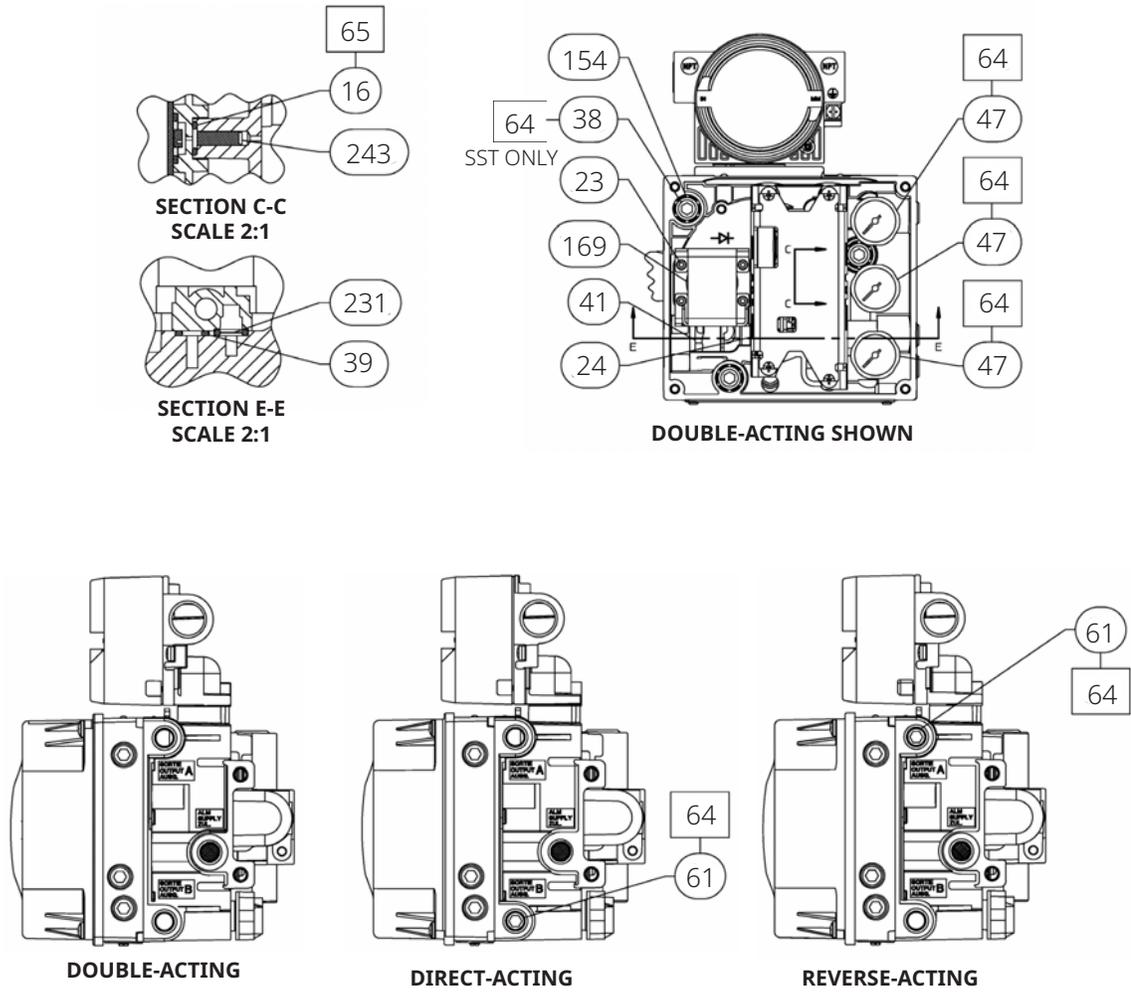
FIELDVUE DVC6205p Base Unit Housing Assembly
